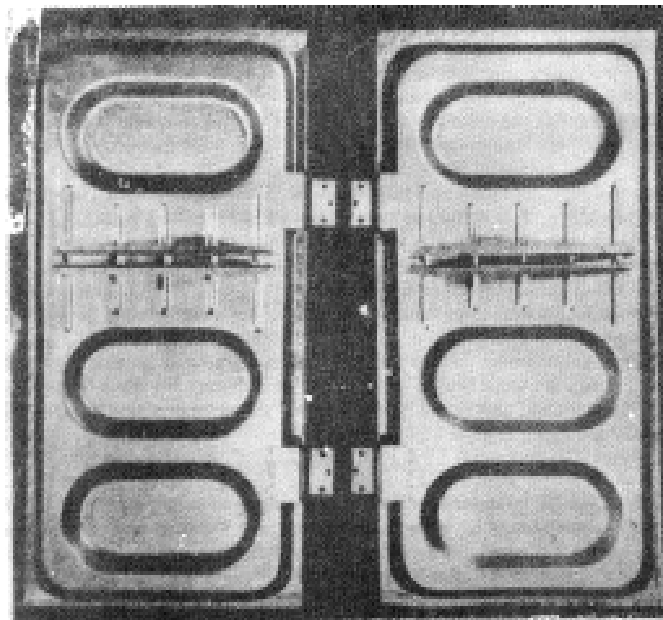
Magnesium-alloy Aircraft Doors Assembled by Riveting and Spot Welding
